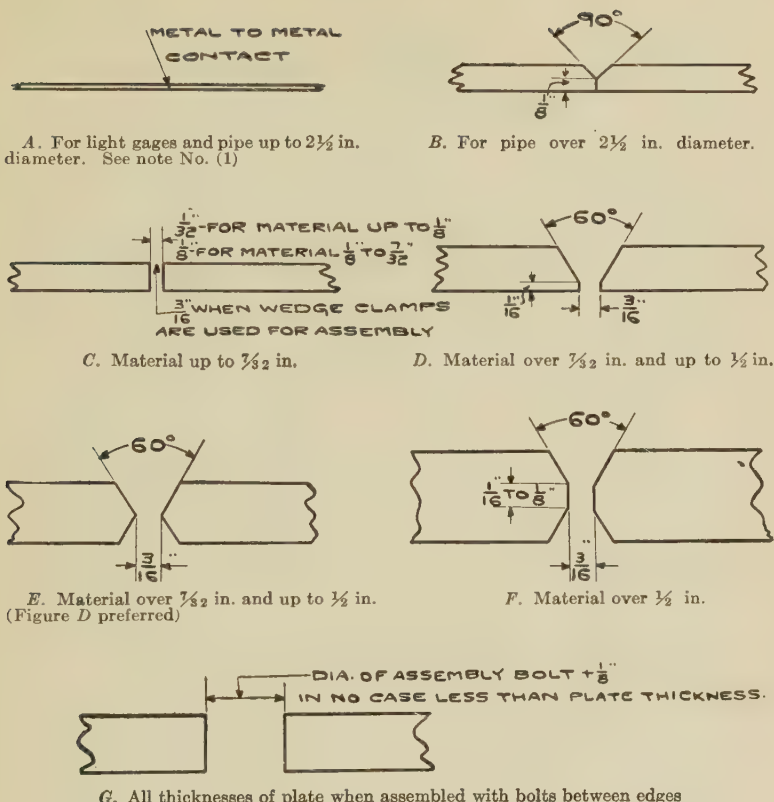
Angle of bevel and opening for metal-arc-welded joints.
